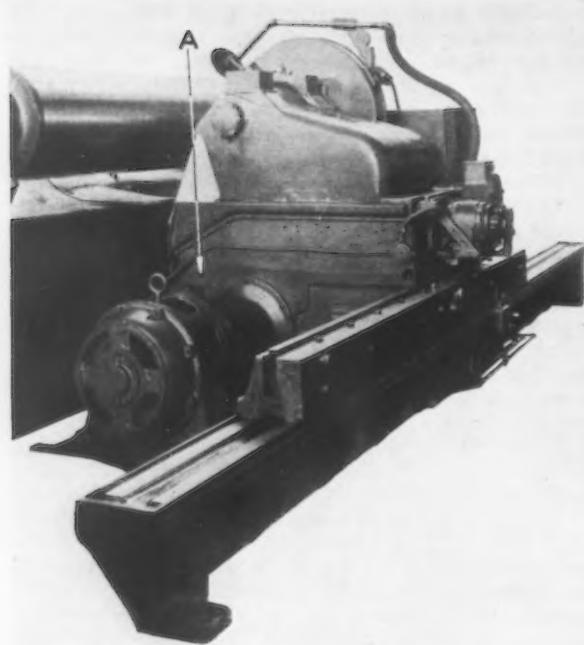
(at center of page) is a front elevation of the new roll grinder. Fig. 3—(at bottom of page) shows how the footstock carries the radius truing device for rounding the corners of the grinding wheel when grinding fillets in the roll ends. Fig. 4—(at left) shows general arrangement of wheelhead drive and cambering mechanism.
